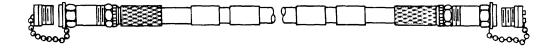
Cable Assembly C-11081/U, drawing number SM-D-497-639.
